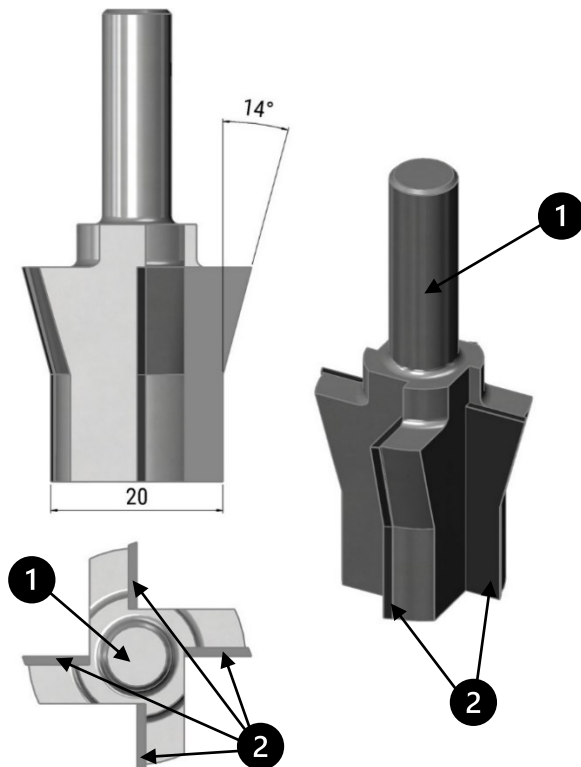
Custom milling tool. (1) Tool body. (2) Cutting blades
